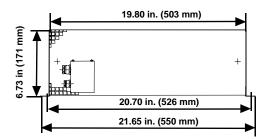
Mounting Dimensions for 460V External Shunt (P/N M.1302.7063)
